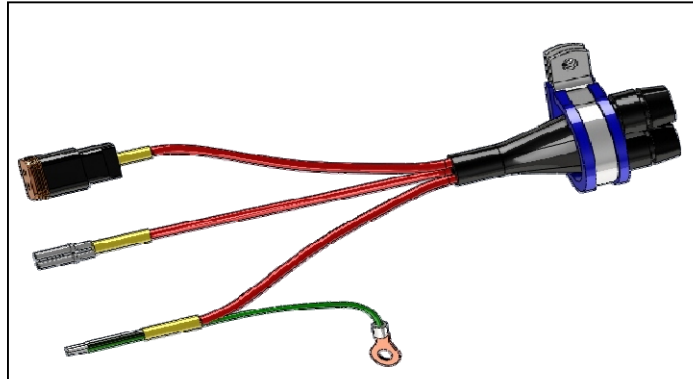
Example of fused link mounted with cushion clamp (Adel)
